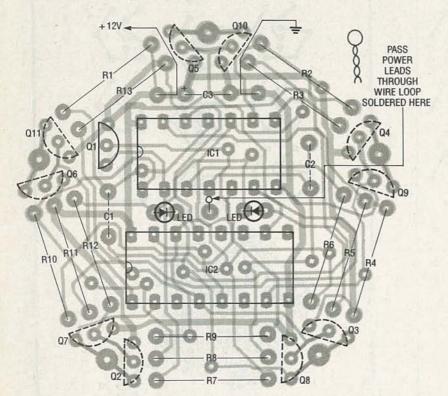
CONTROL BOARD PARTS PLACEMENT. Capacitors C1 and C2, and all of the transistors, except Q1, are installed on the solder side of the board. The "c" silkscreened on the board indicates the collector lead of each transistor.
